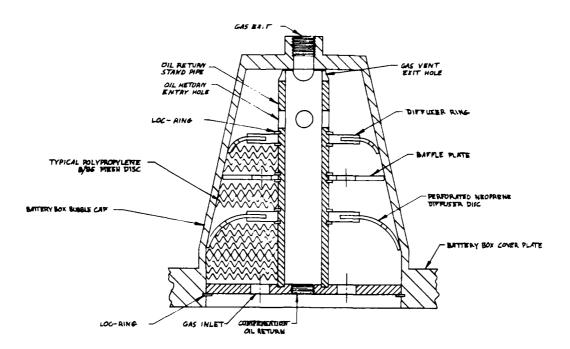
Cross Sectional Sketch of Hydrogen Gass Bubble Breaker Assembly
